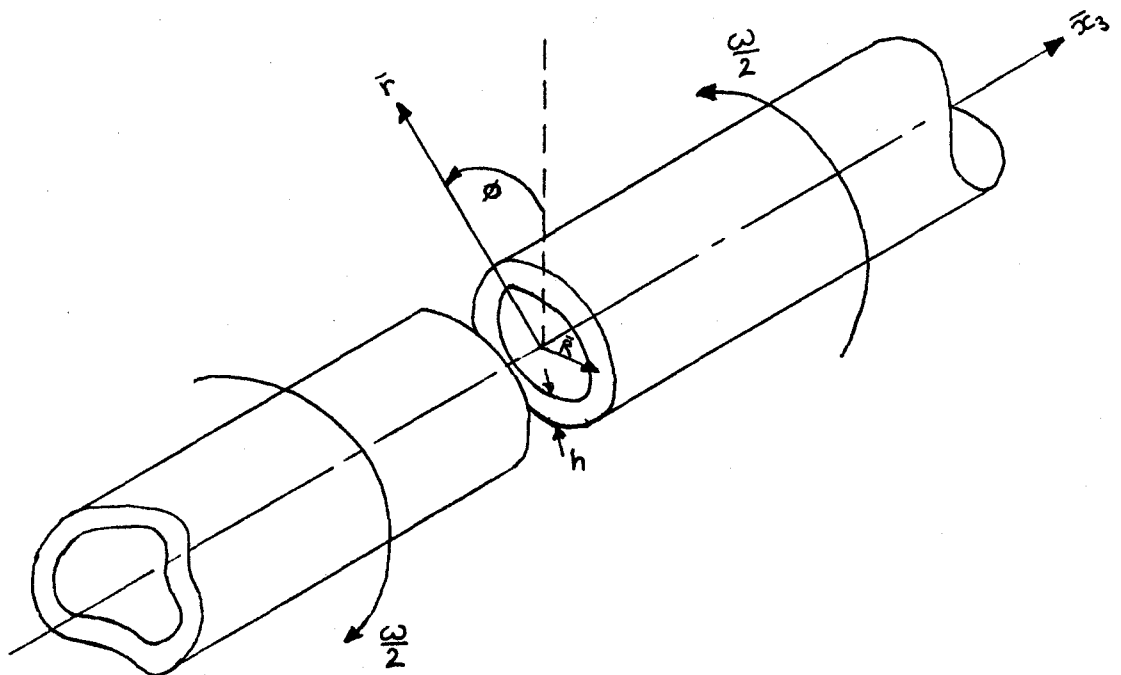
Geometry for the Case of Welding Thin Walled Tubes.
